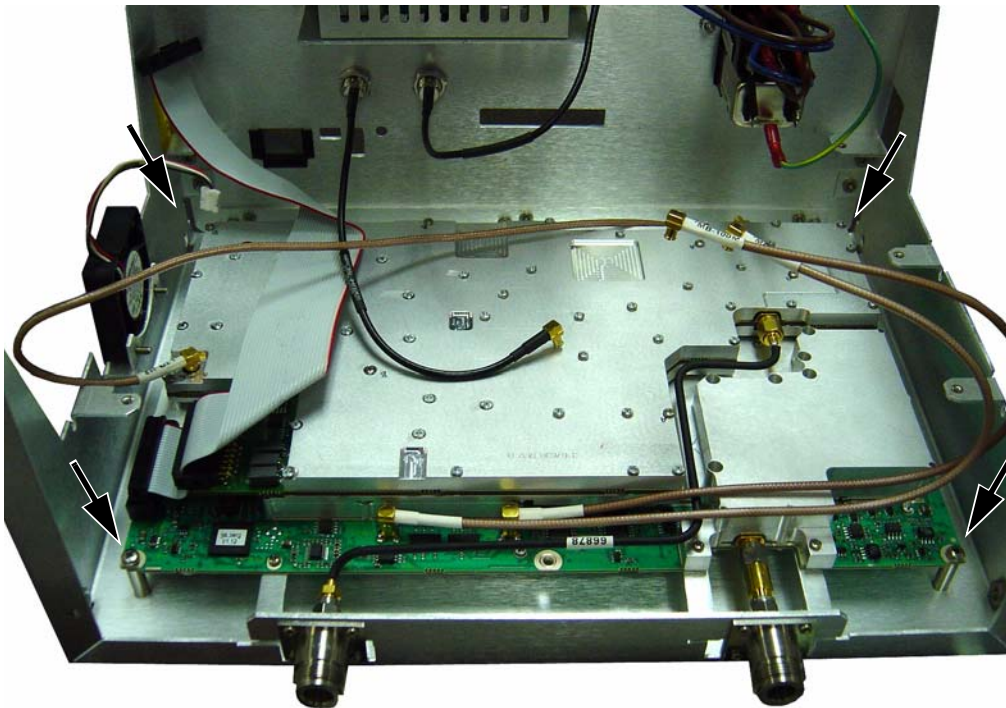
SPA PCB in Chassis (with Option 20 installed)
